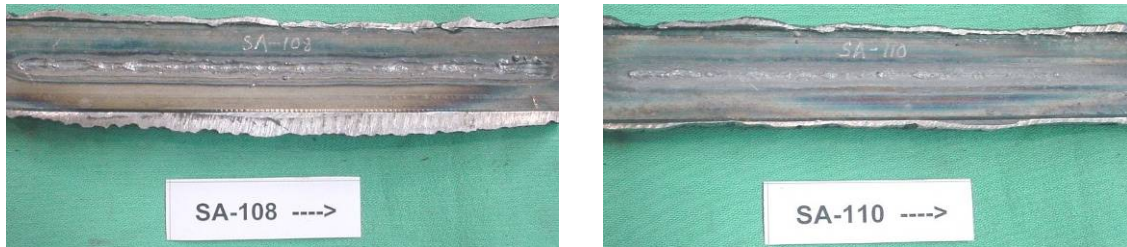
View of Penetration Bead Profiles in Welds SA-108 and SA-110
